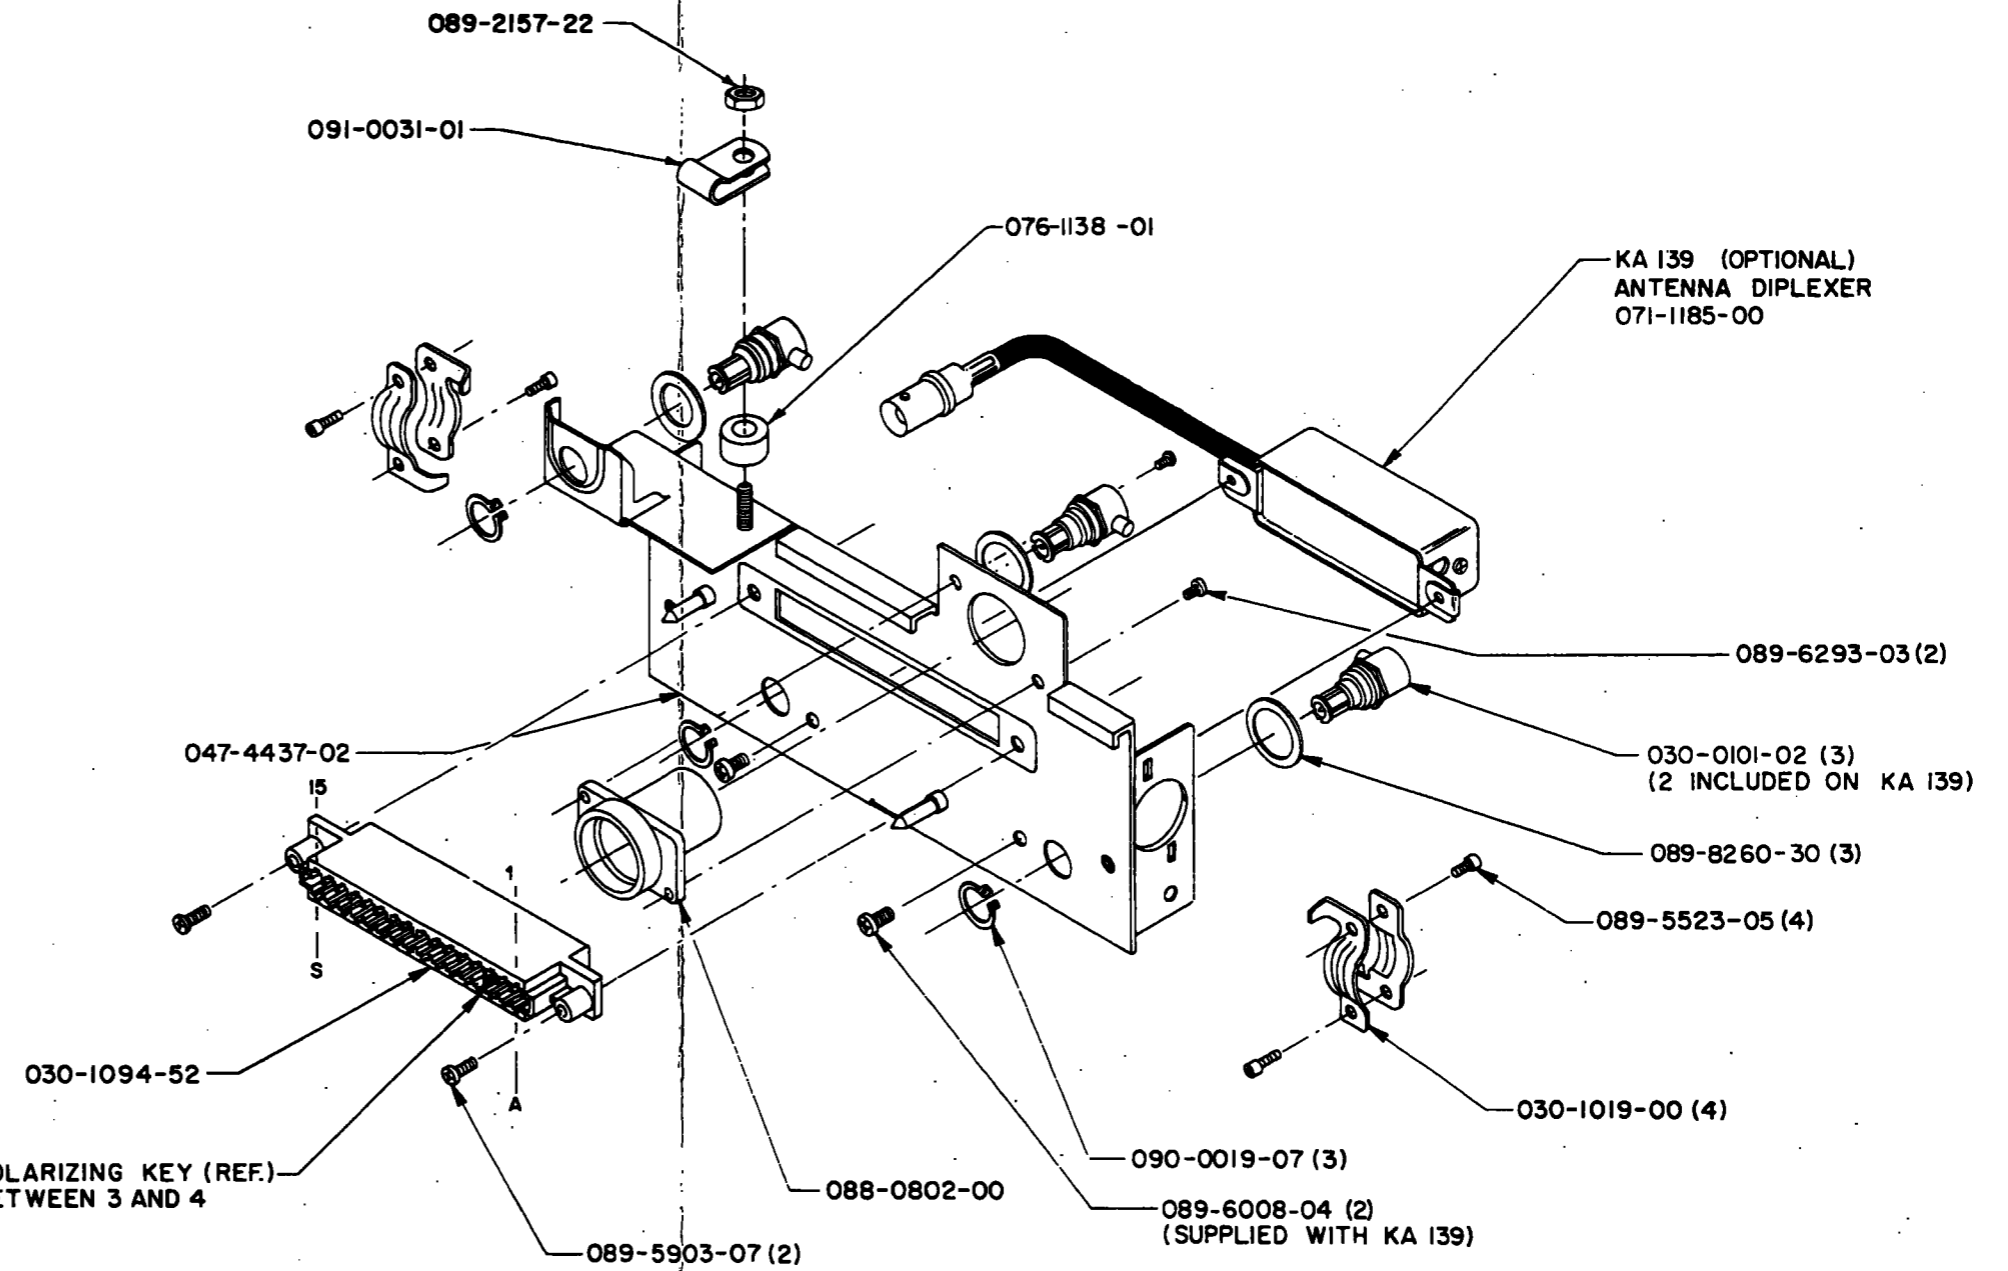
030-0005-00 CONNECTOR ASSEMBLY
